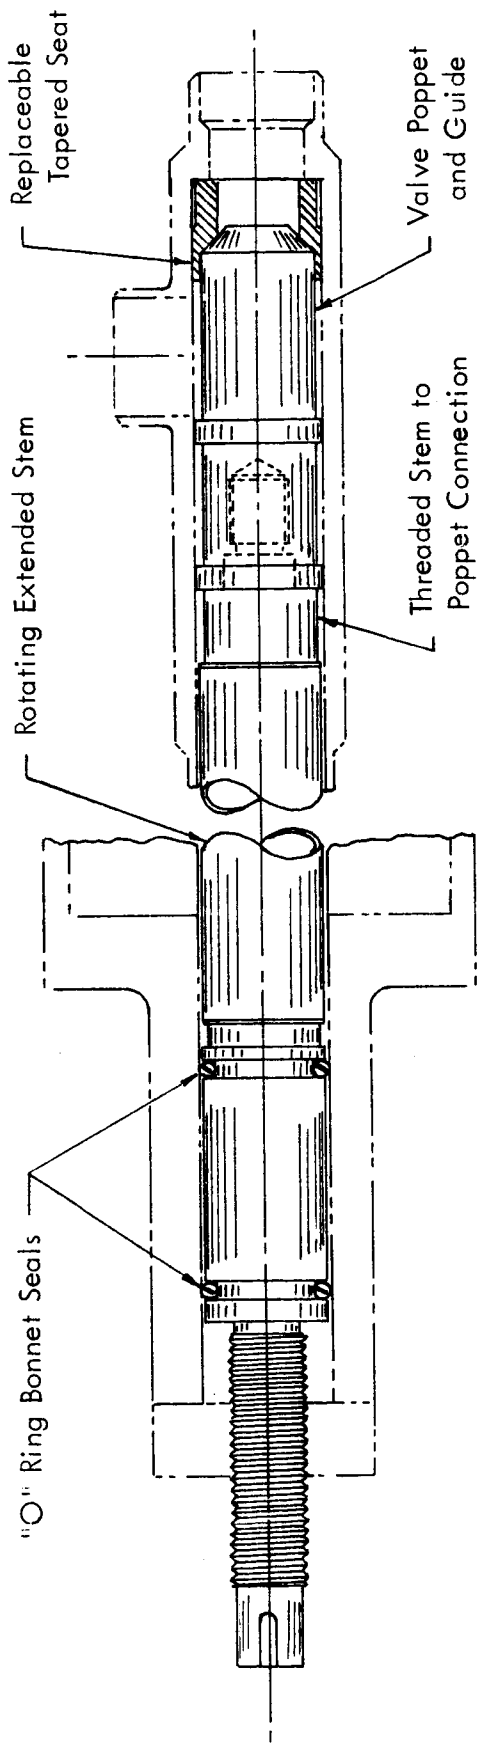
ORIGINAL EXTENDED STEM VALVE INSTALLATION
